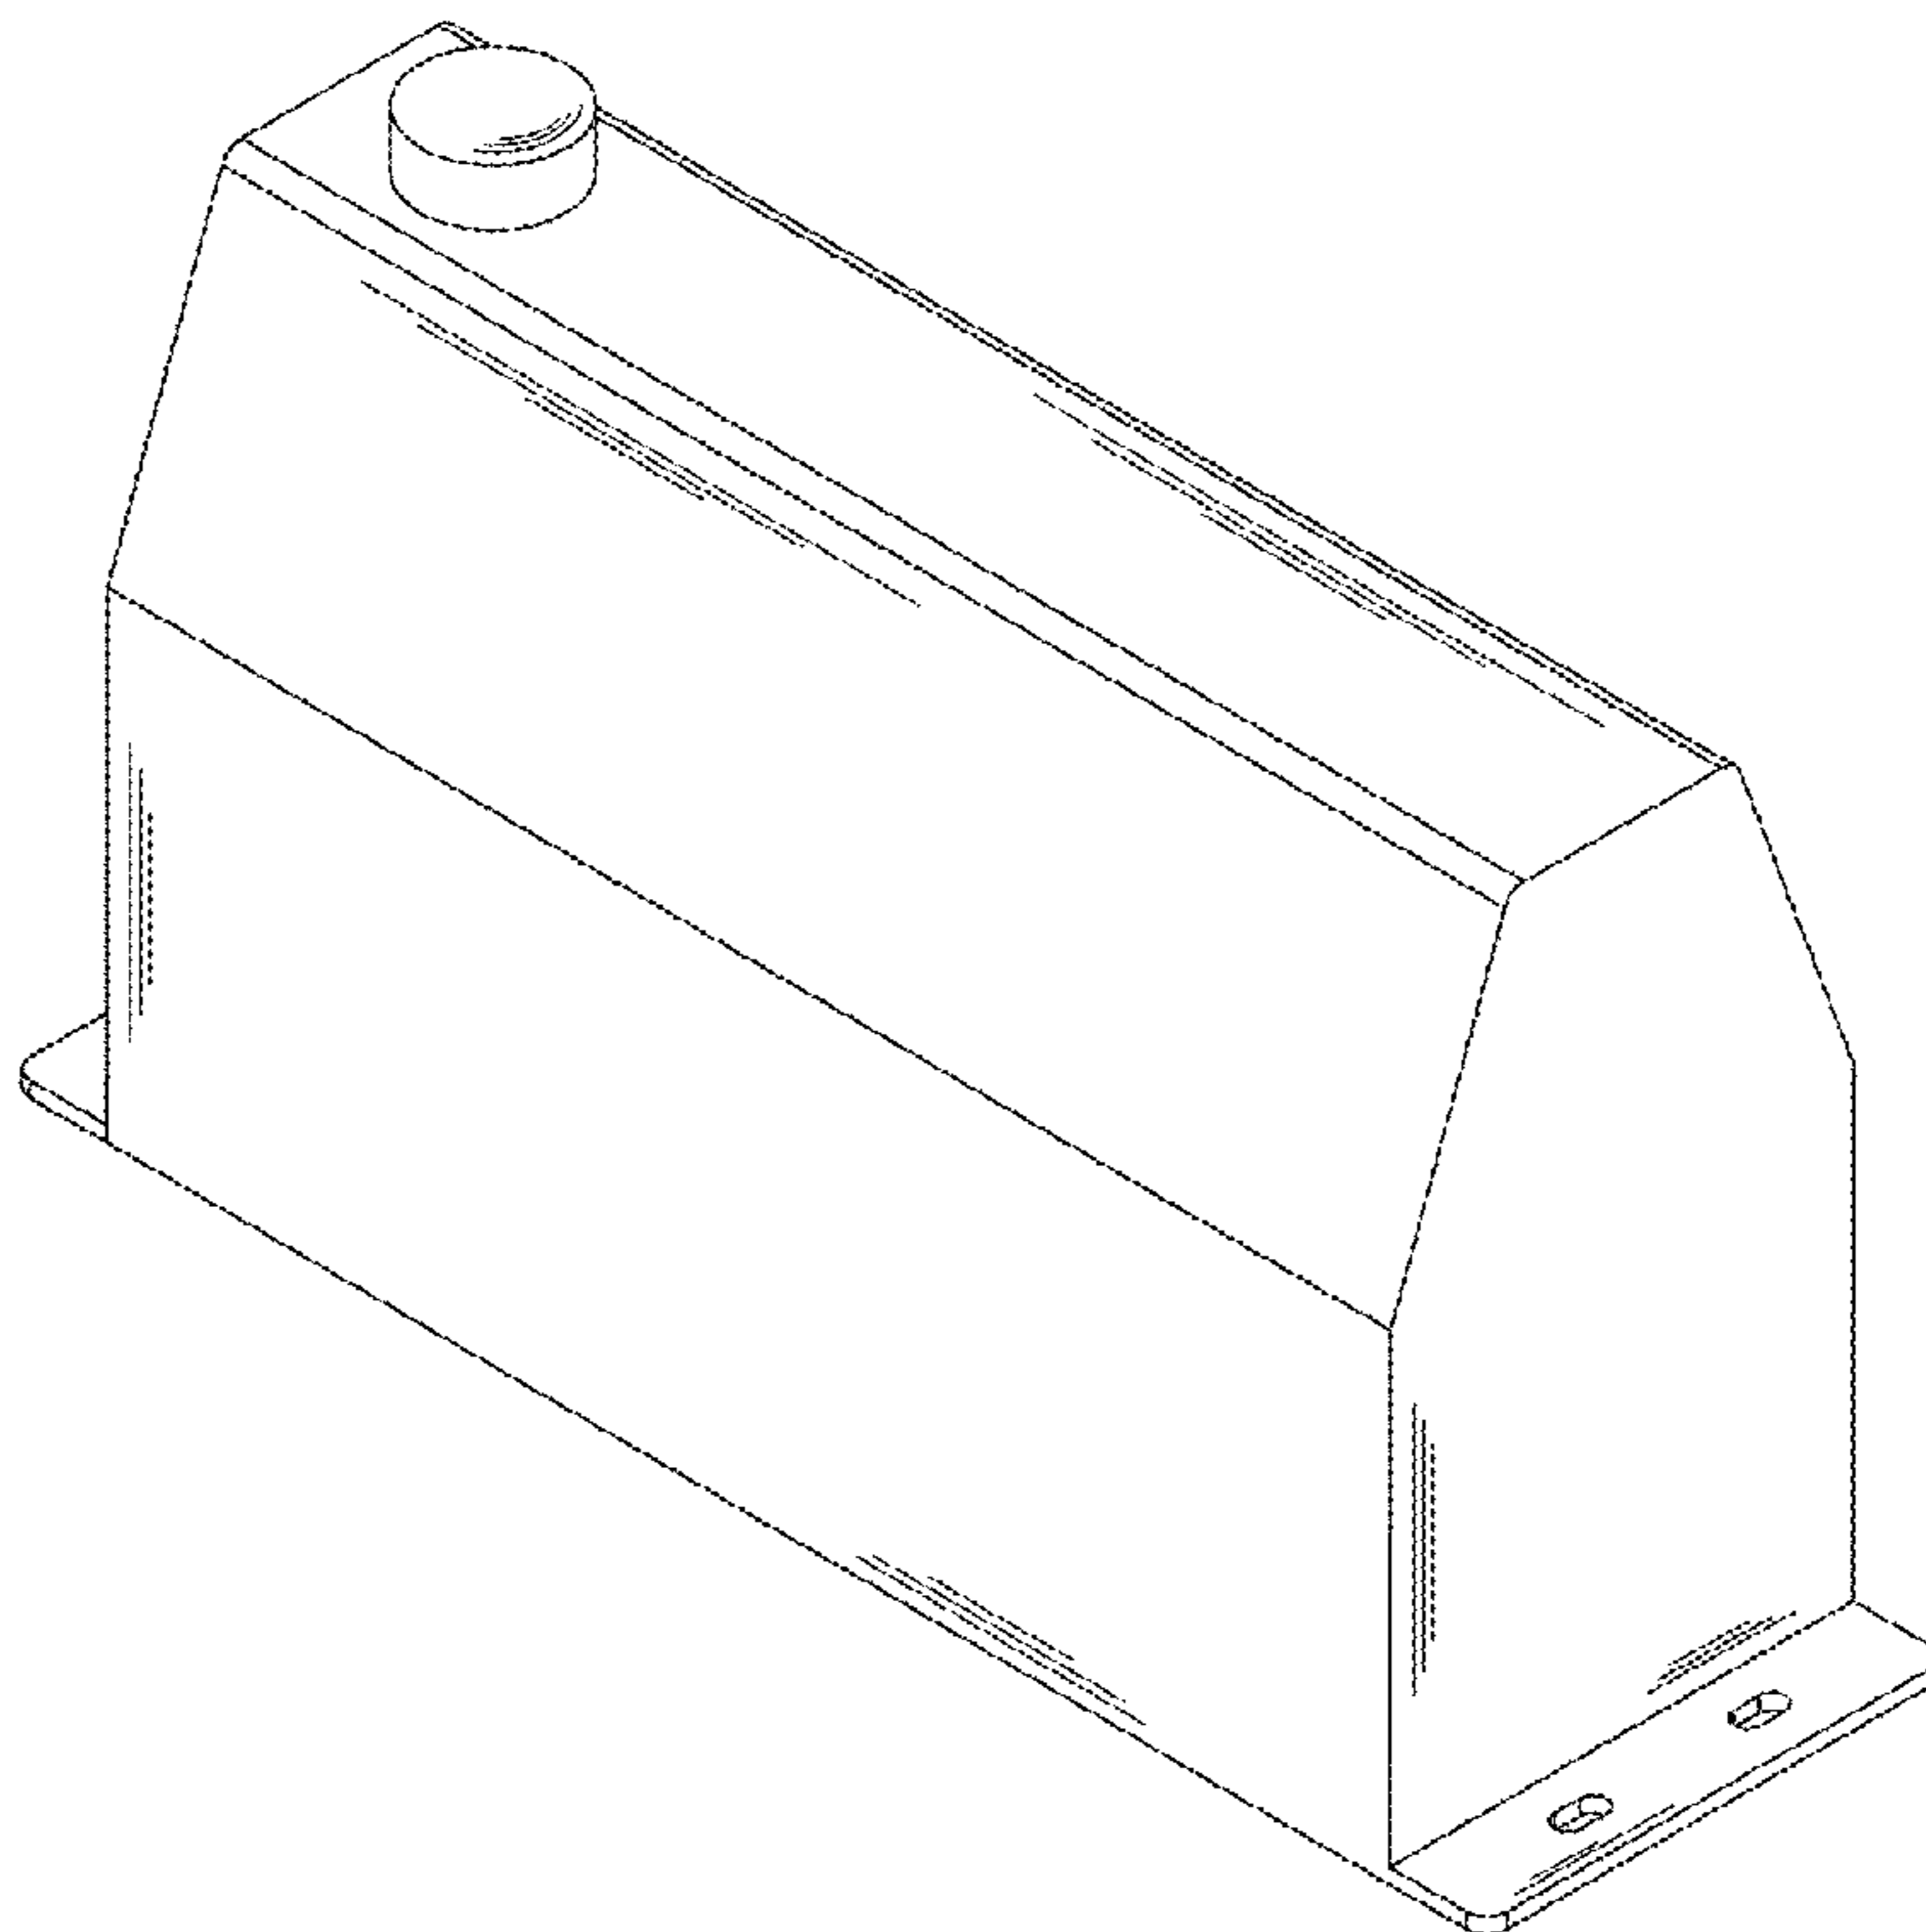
is a front perspective view of a brake actuator embodying my new design;
